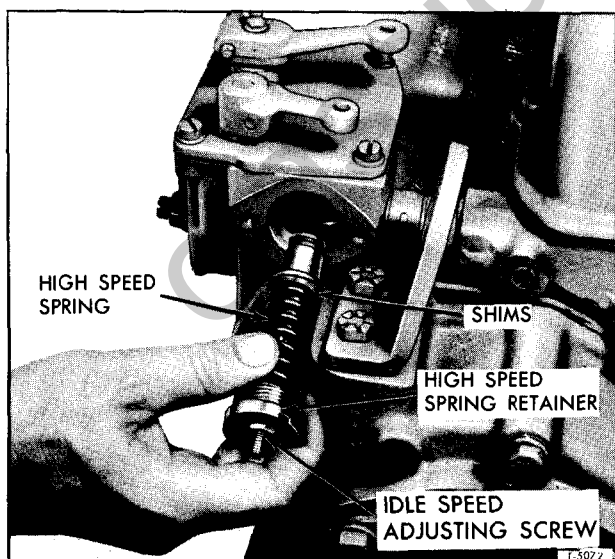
Adjusting Maximum No-Load Engine Speed (Typical)
